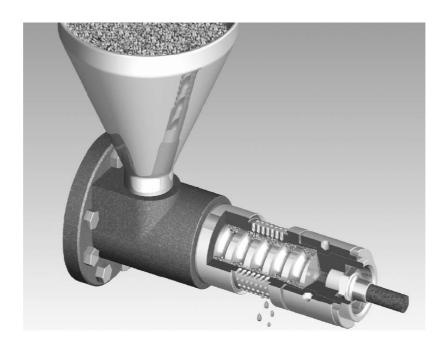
Detailed Picture of Screw Press Manufactured by Oekotec, IBG-Monforts [36]
